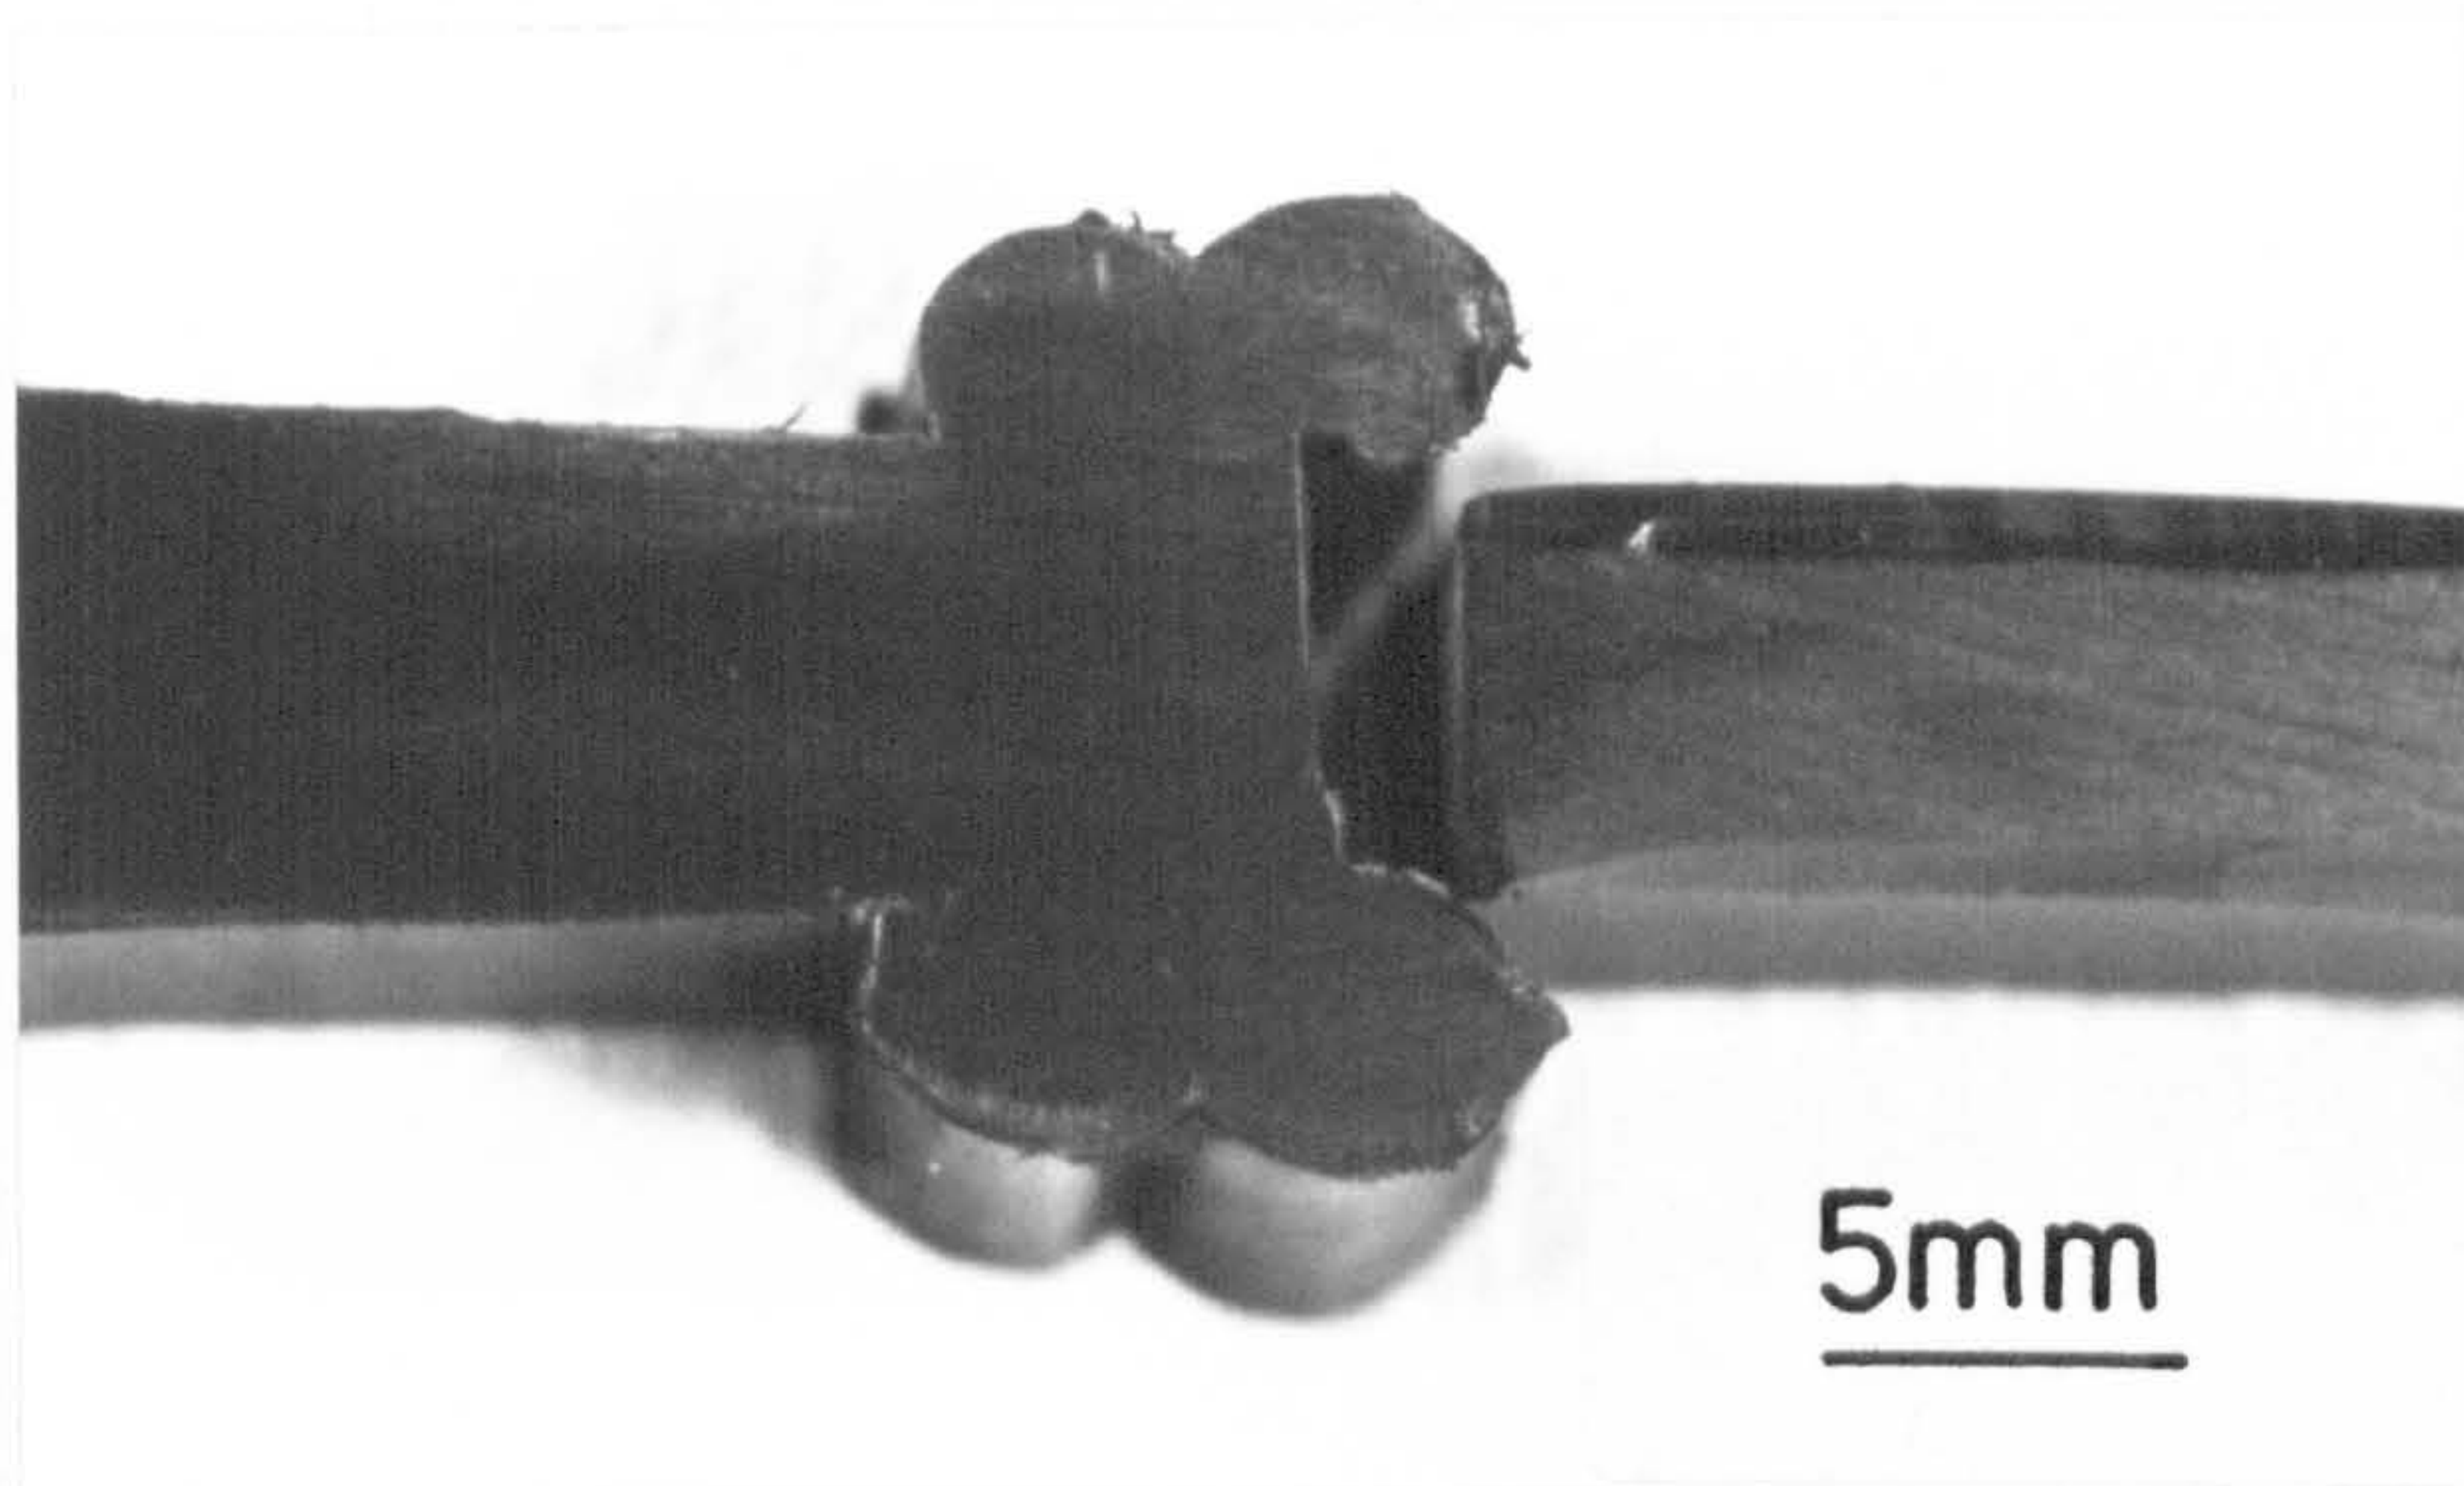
Circumferential butt-weld fracture (P/P Type 2) in an HDPE 1 pipe system. The path of the fracture is associated with the line drawn between the notches formed by the beads and the pipe surfaces. (Only P/P Type 2 butt-weld fractures were observed in MDPE 1 welded pipe systems.)
